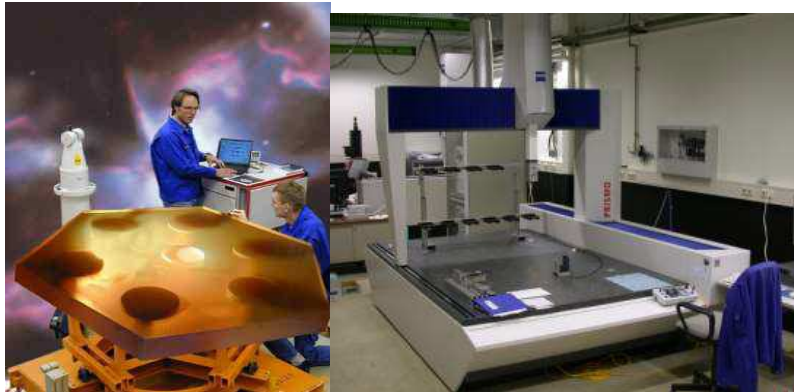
Measurement of mirror blank segments with a laser tracker system (left), large CMM at manufacturer (right).
